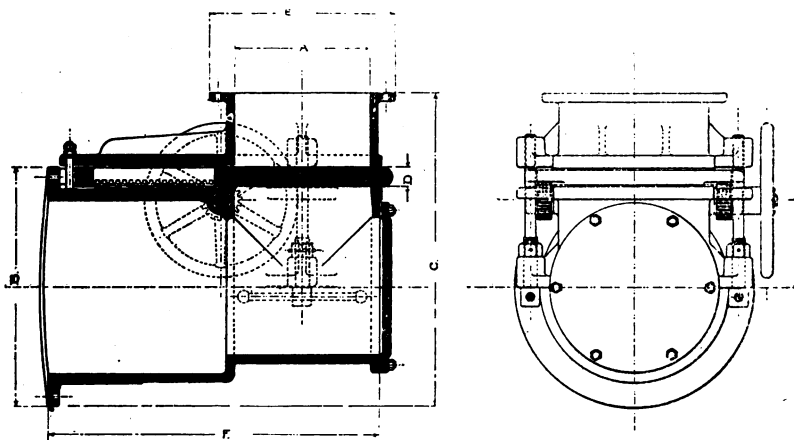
GAS VALVE FOR OVERHEAD GAS MAIN.
